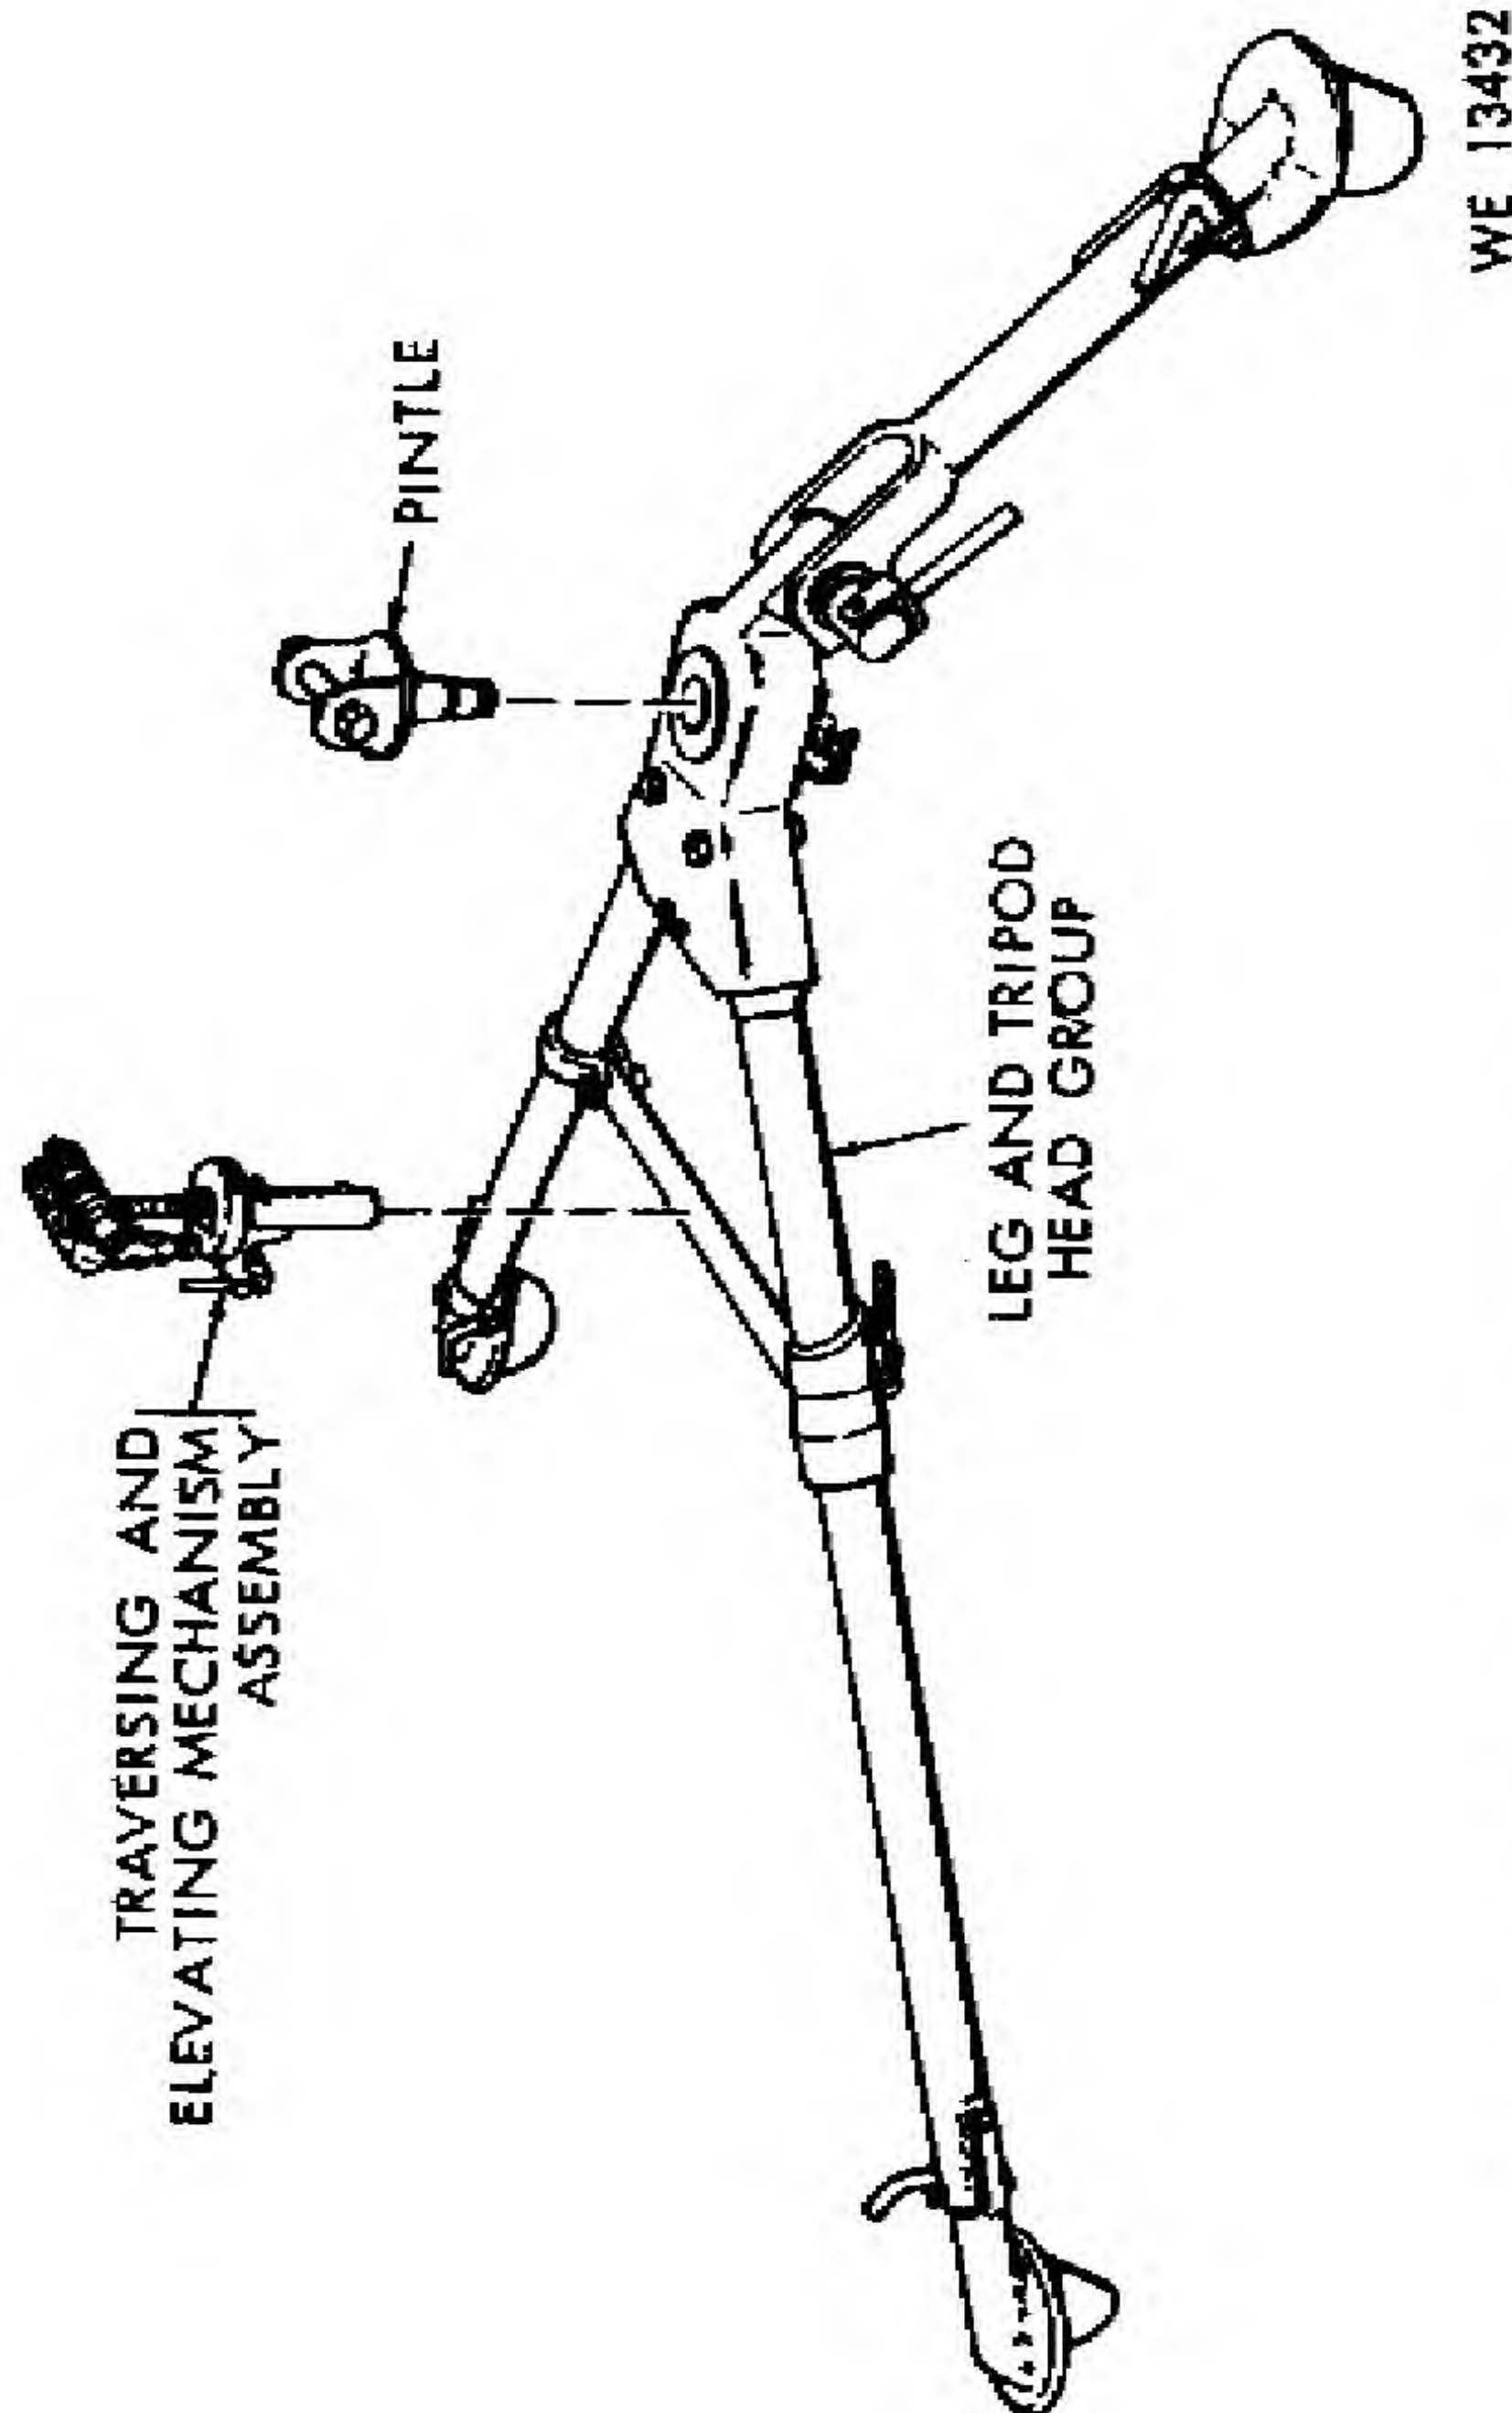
Tripod Mount, M3—Major groups and assemblies.
